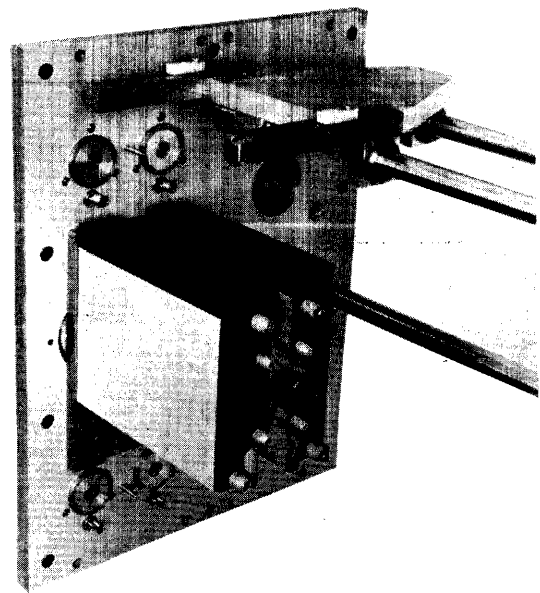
Photograph of Front Panel with Tape Drive Blocks and Loading Carriage.
